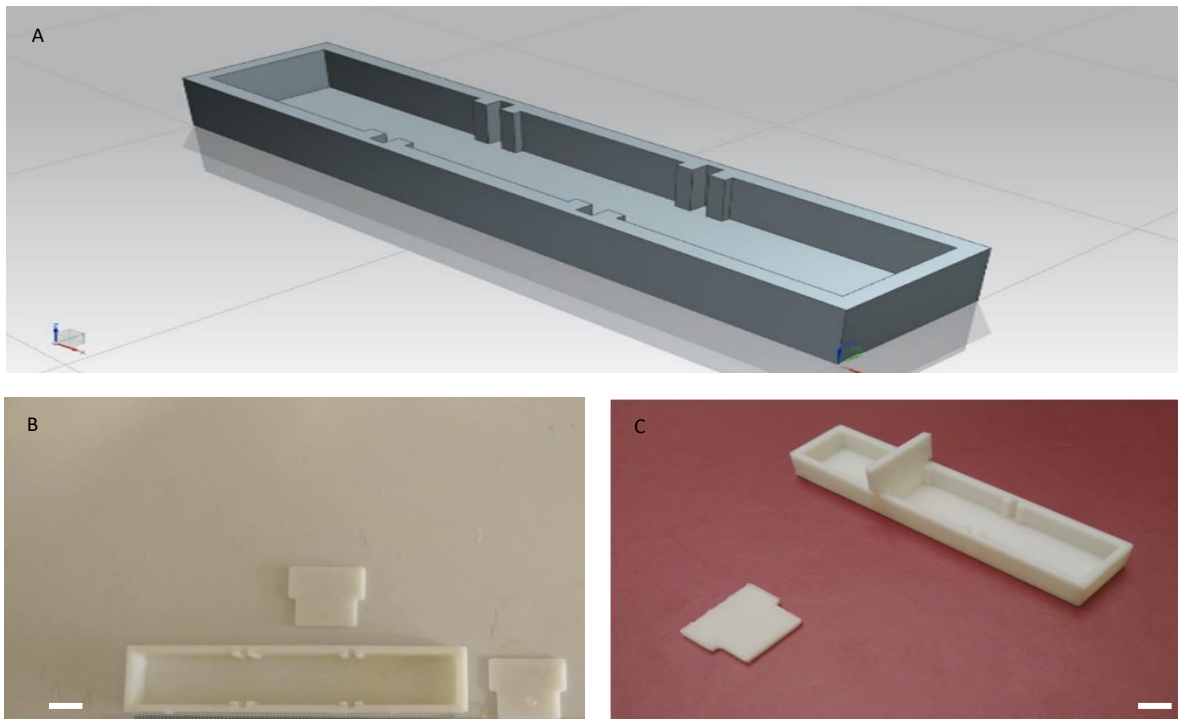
Images showing the long 3D printed model (A) CAD design (B) printed and (C) one sliding divider inserted. Scale bar = 10 mm
